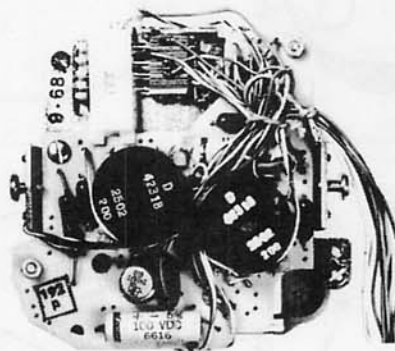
B. "TEL-TOUCH" Pushbutton Dial, Rear View
